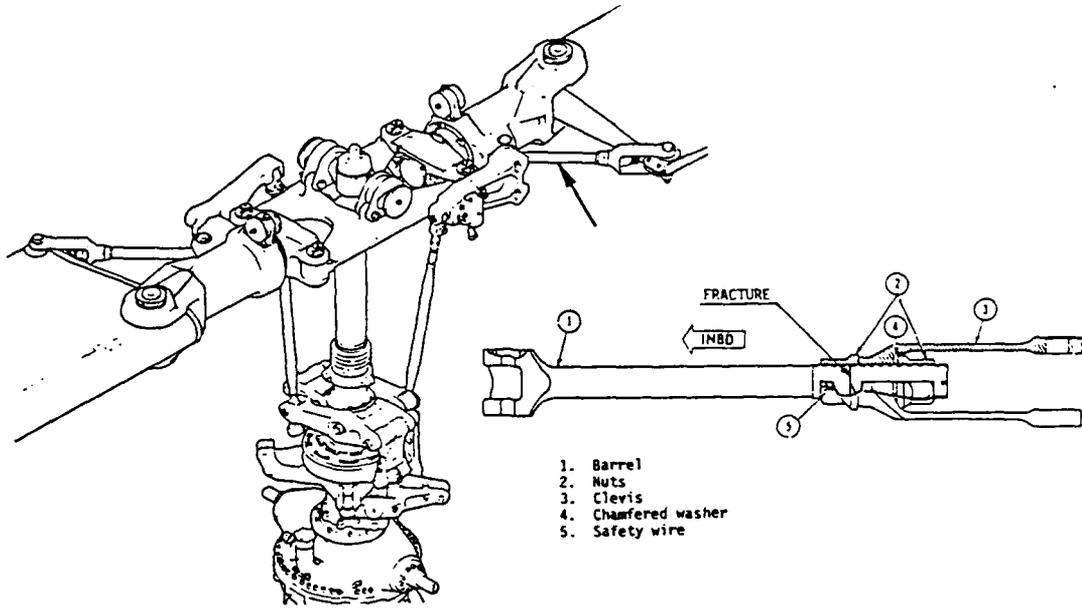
BELL 214ST MAIN ROTOR HEAD AND DRAG BRACE
